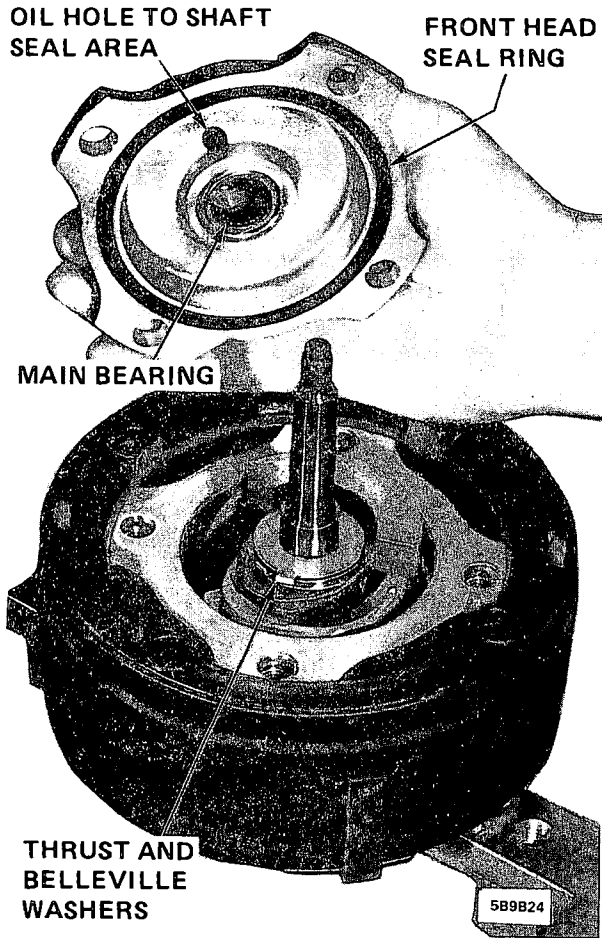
B-48 - Front Head Removed - 4 Cylinder Compressor
